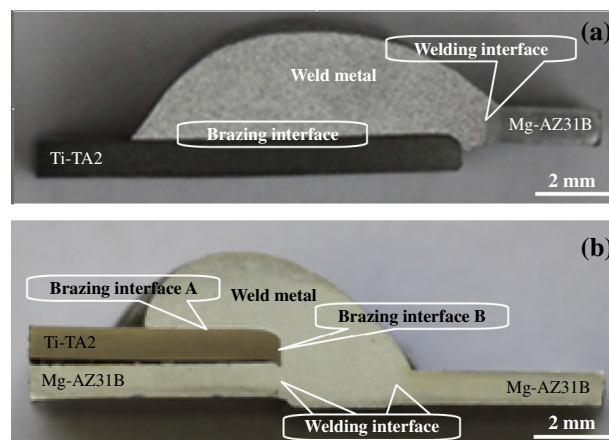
Cross sections of two joints: (a) Mg–Ti joint (top Mg sheet–bottom Ti sheet), and (b) Ti–Mg joint (top Ti sheet–bottom Mg sheet).
